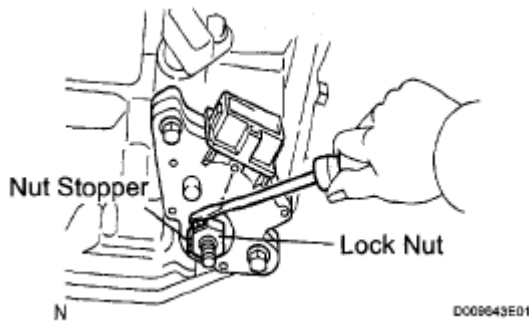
Unstaking Nut Stopper Using Screwdriver
